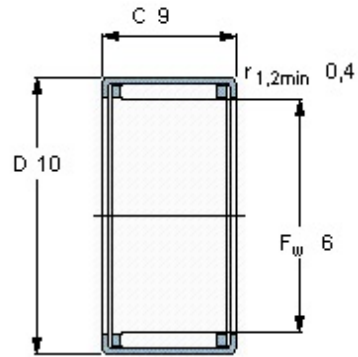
Drawn cup needle roller bearings with open ends (HK0609).
